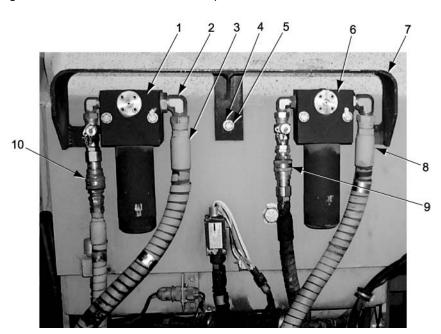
Components to be Removed/Relocated in Main Pump Filter Area
